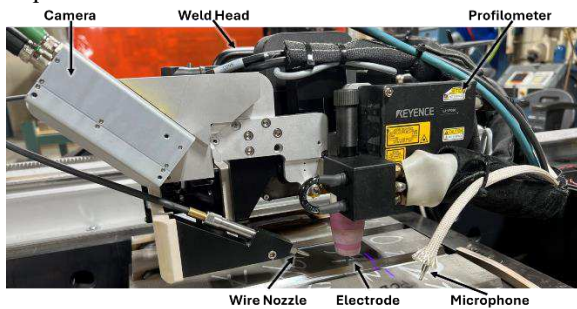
GTAW Adaptive Welding System with Sensors.
